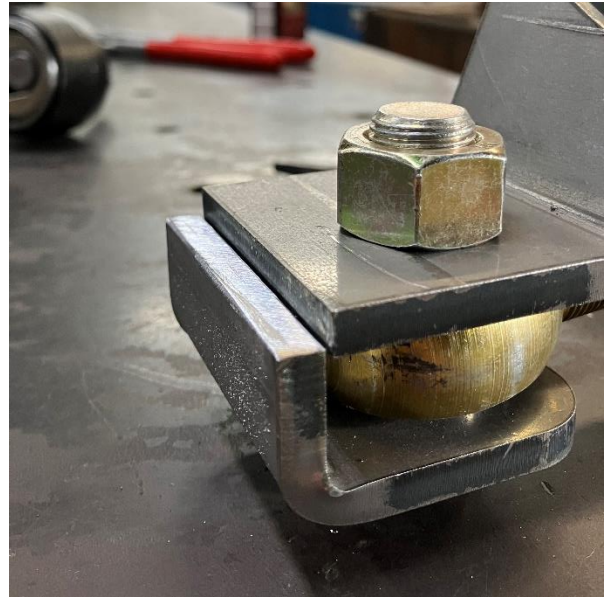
and 24. Fully Welded Sway Bar Tab on the Driver Side Axle Tube
